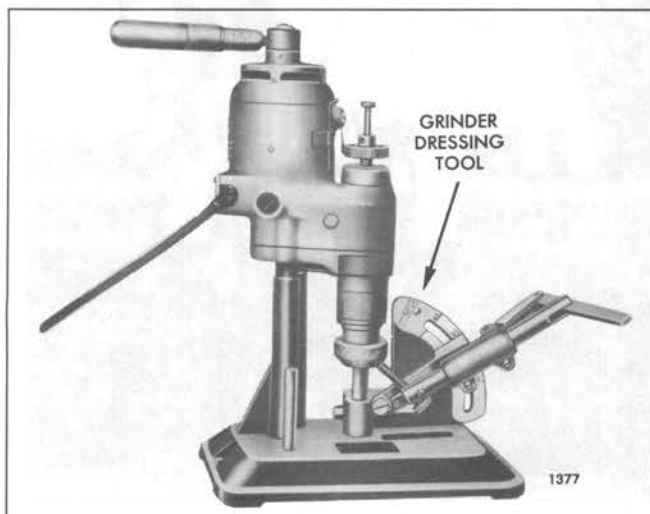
Grinding Wheel Dressing Tool of Set J 24566
